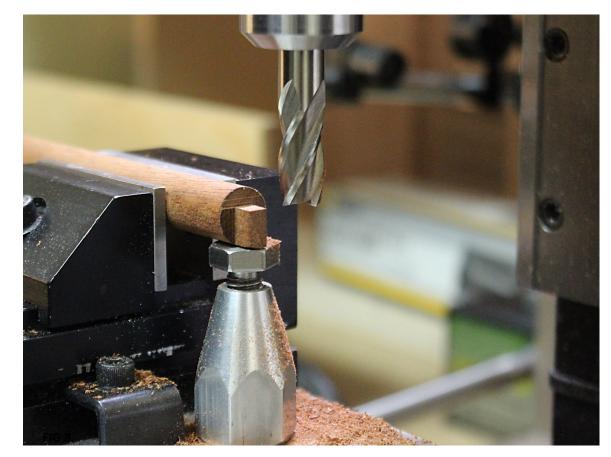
showing both sides are now cut and are should be exactly parallel. Also if you wish to measure, the extrusion should be 5 mm wide.
